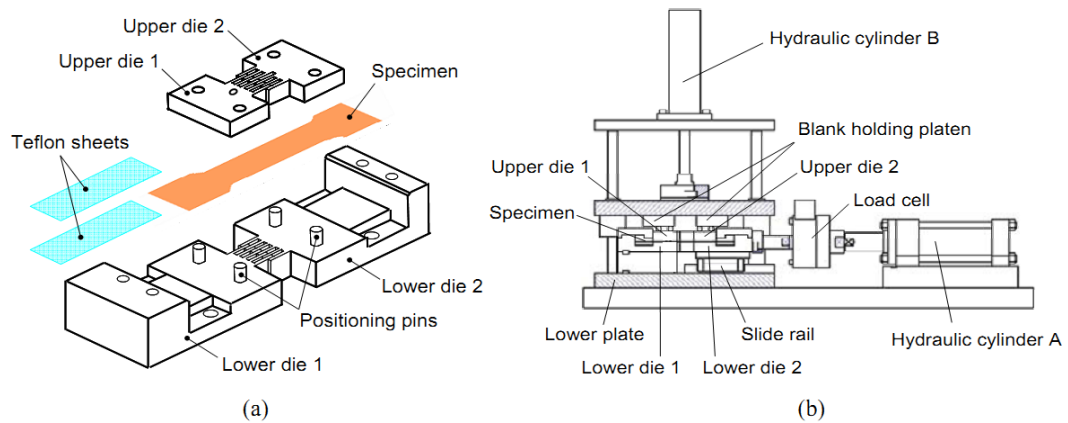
Kuwabara's comb-shaped device to prevent compression buckling (a) comb shape dies and (b) testing machine (Kuwabara et al. 2009)
